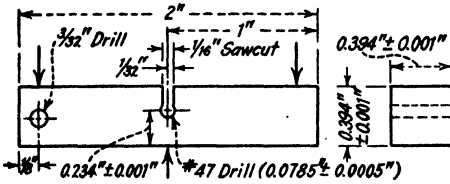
Charpy Transverse Type Impact Specimen. Saw cut must not strike side or bottom of drilled hole.
